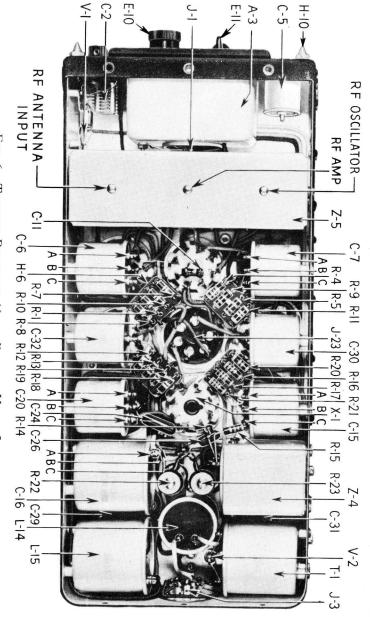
Typical Receiver Unit, Bottom View, Inside
